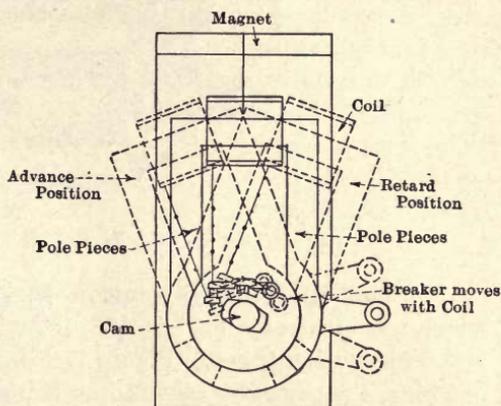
Showing movement of Dixie coil and pole pieces with the interrupter or breaker.
